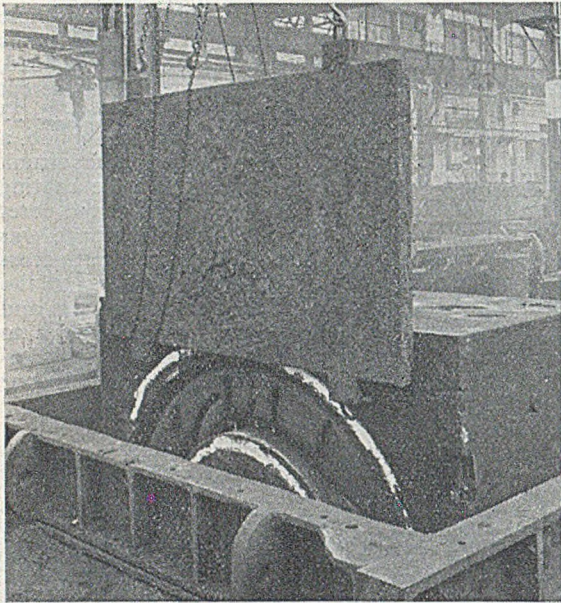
Setting a Loam Plate to Cover the Trunk Side.
